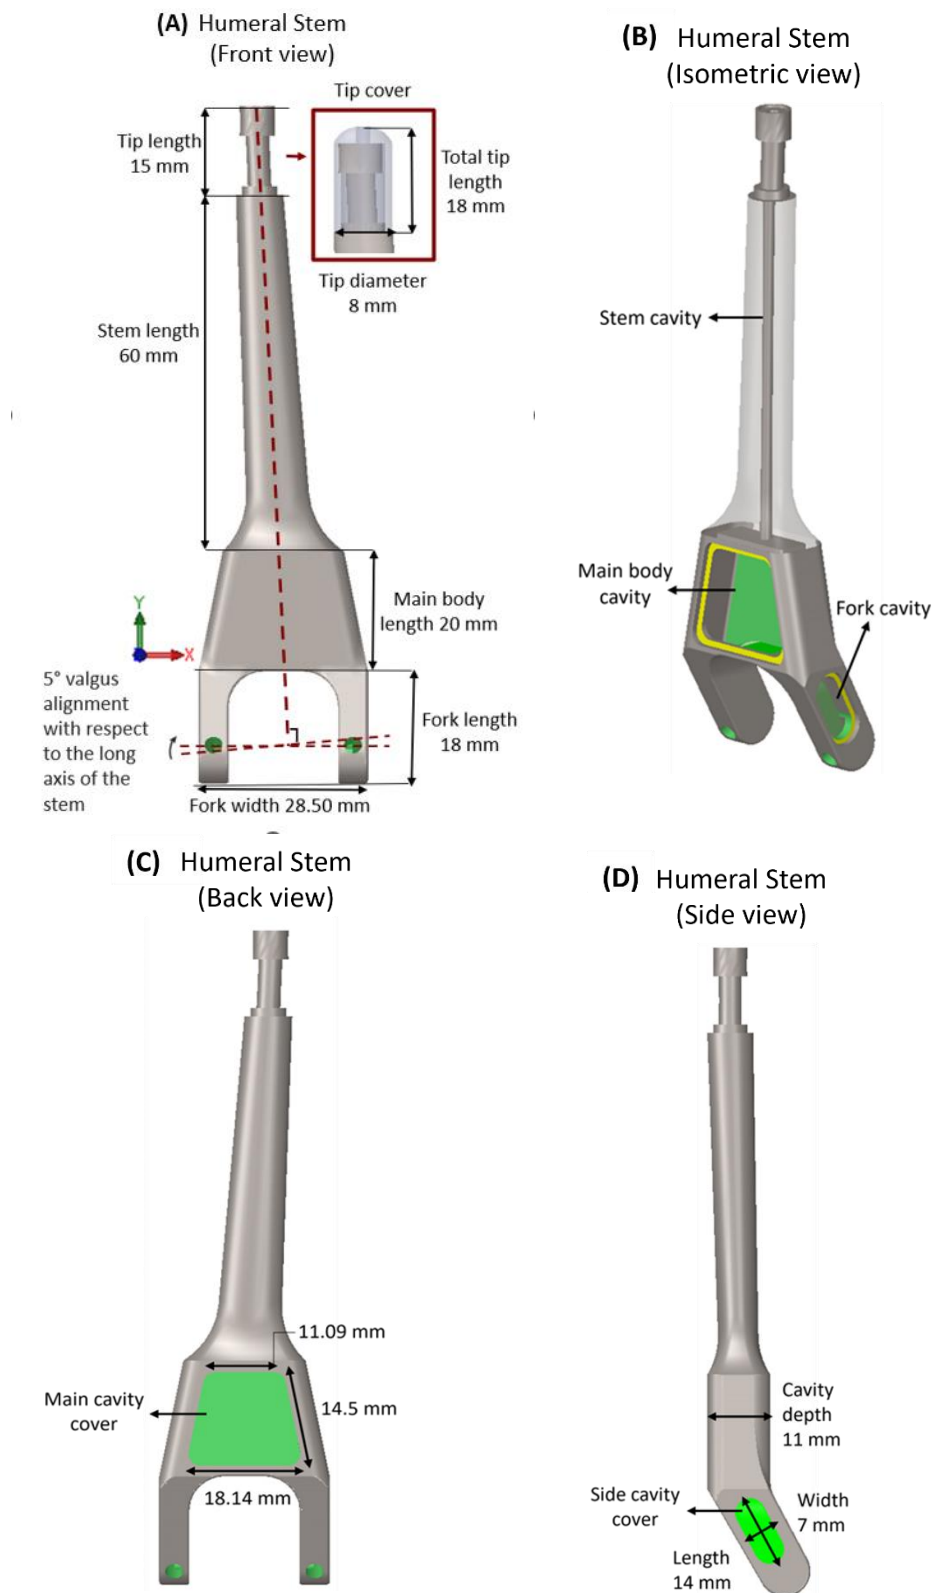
(A) Humeral Stem design and dimensions (B) Isometric view of implant with main body cavity and side cavity (C) Implant main body cavity dimensions (D) Implant side cavity dimensions.
